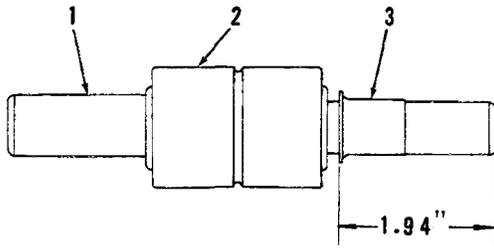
SHAFT, BEARING AND SLINGER ASSEMBLY
